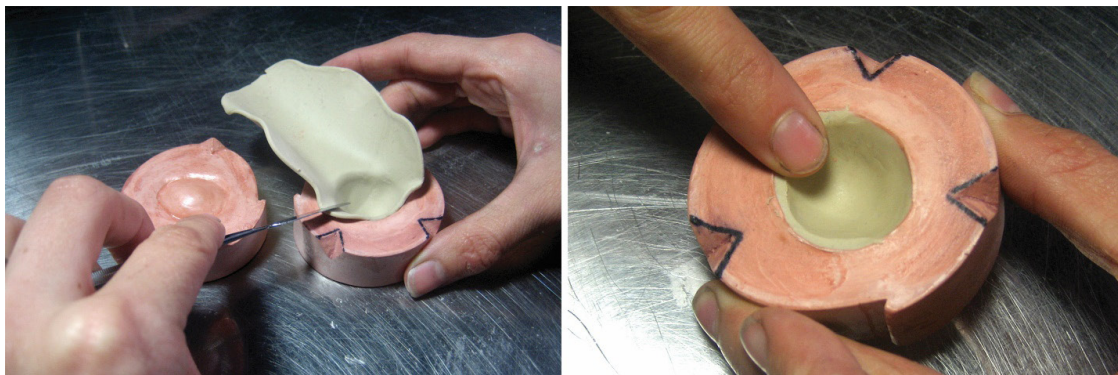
Clay being pressed into mold (L). Graduating edge of clay (R)
